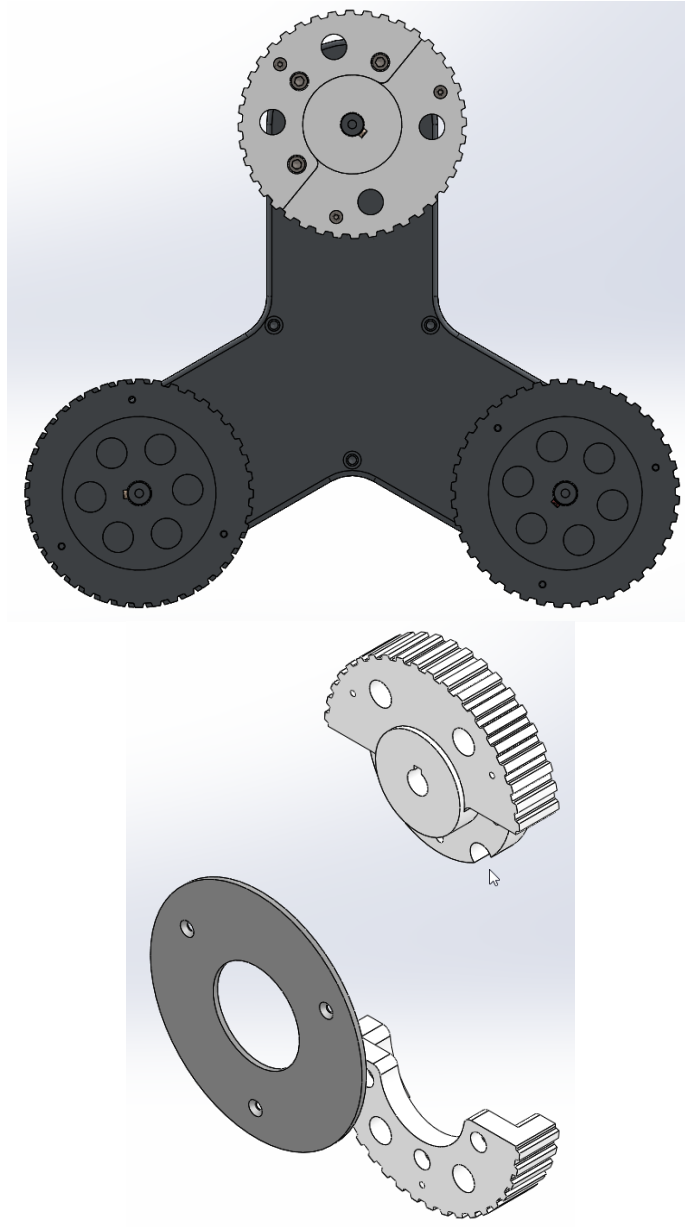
Timing Gear Assembly and Timing Belt Tensioning Mechanism
